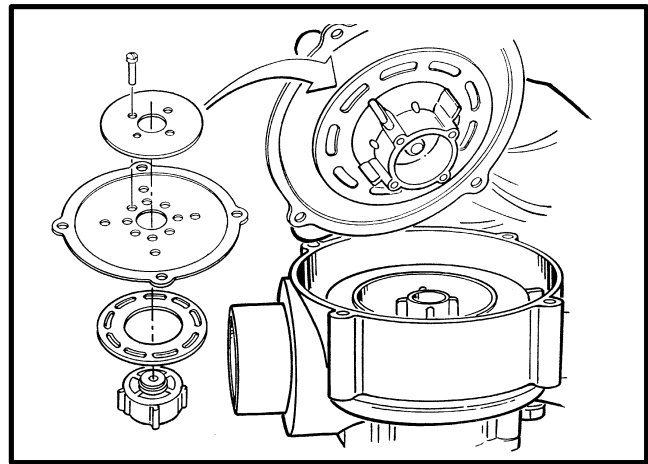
DIAPHRAGM AND FUEL VALVE ASSEMBLY
